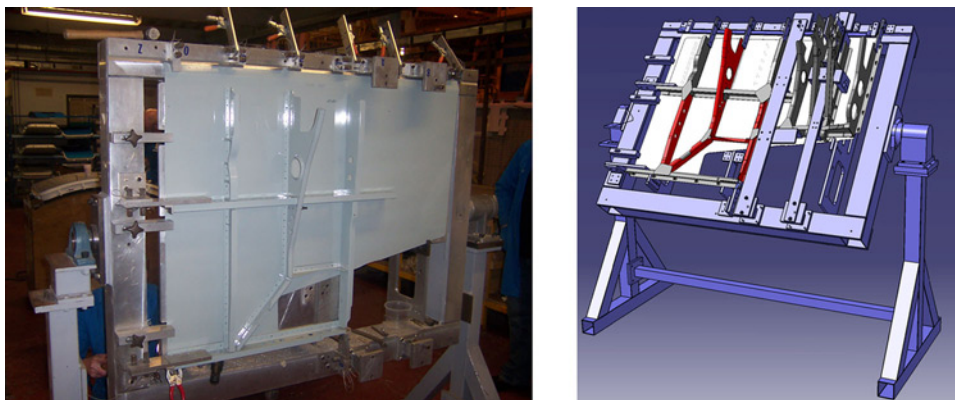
Uplock and Apron assembly (with fixture) and its CAD model.
